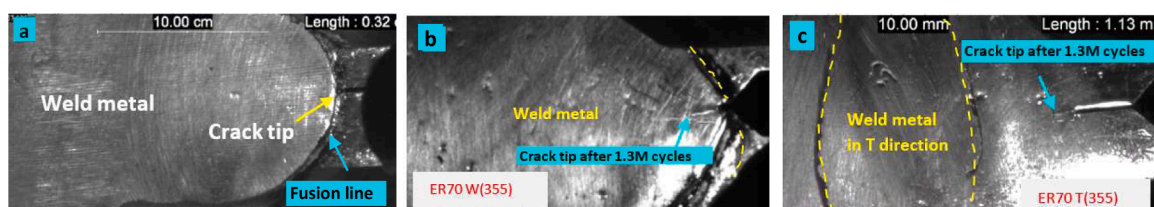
Crack tip positioning during ER70 testing; (a) crack tip outside the weld metal, (b) crack tip inside the weld metal, (c) weld metal in perpendicular direction to the FCG front.
